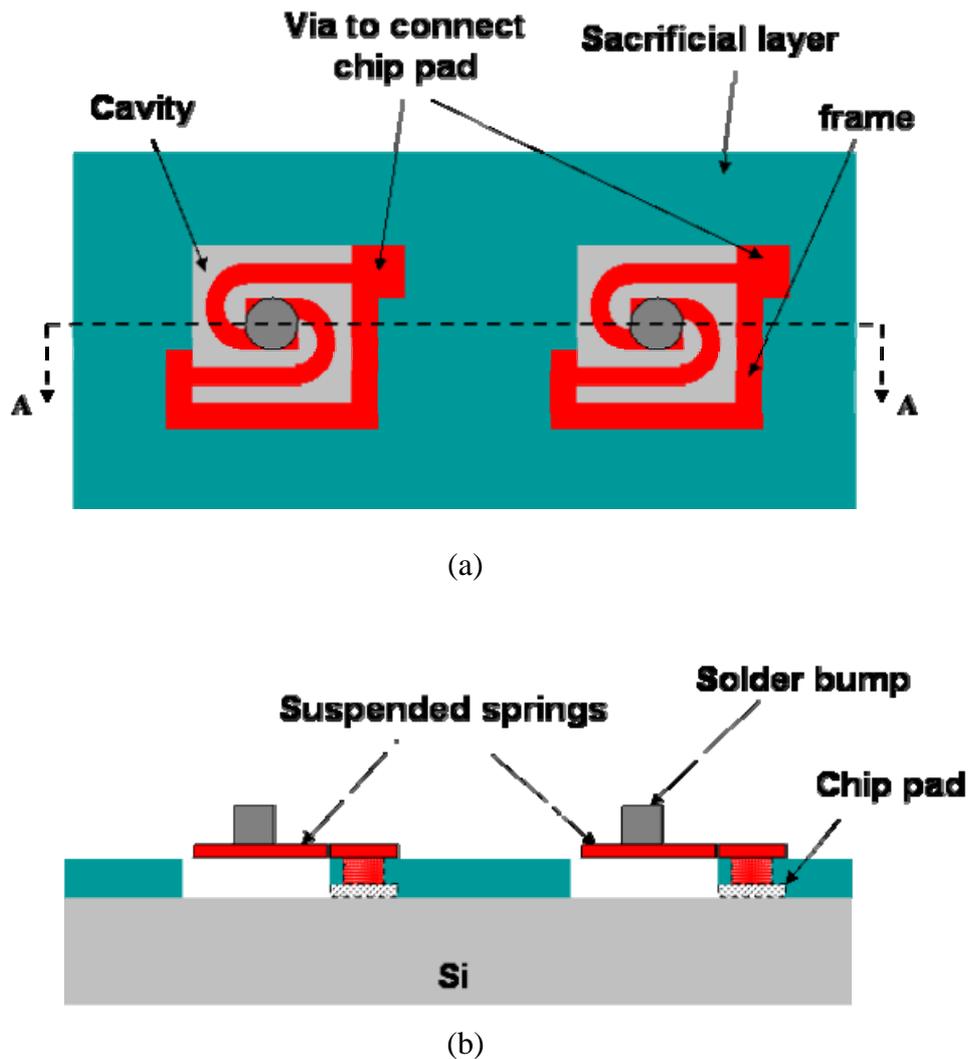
Schematic of *Planar Microspring* interconnects (a) plan view; (b) A-A cross section view
